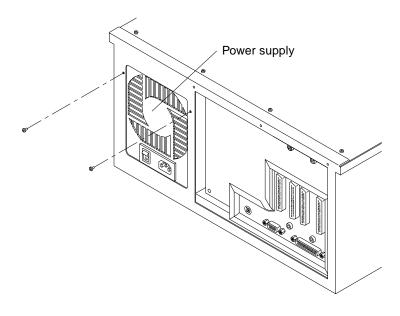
Removing the Power Supply Screws from the Back of the Chassis
